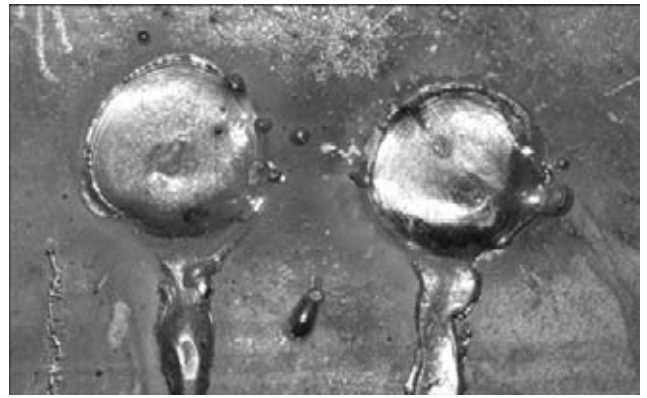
Appearance of spot during welding in the vertical plane with flowing out of molten metal and non-uniform formation of spot joint
